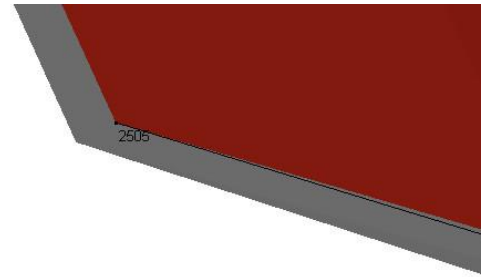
springback angle 0.188° for sheet thickness 4.0mm
